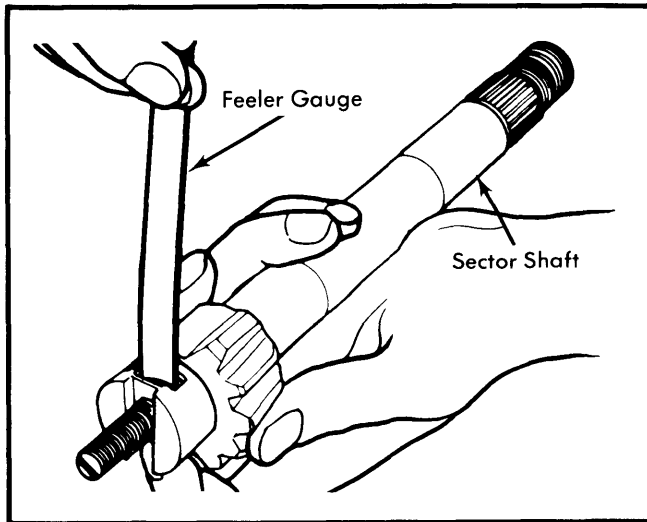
Measuring Sector Shaft-to-Adjusting Screw End Play
